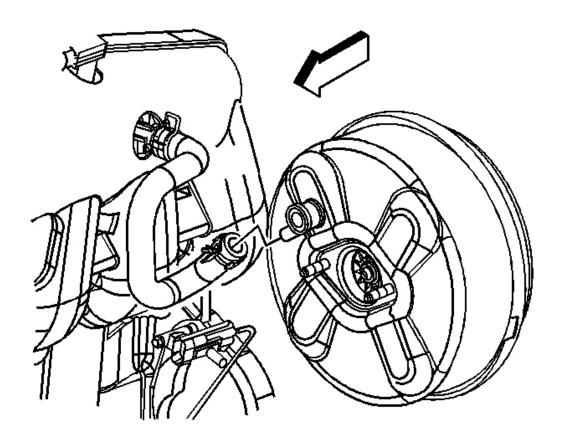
View Of Vacuum Brake Booster Hose Courtesy of GENERAL MOTORS CORP.
